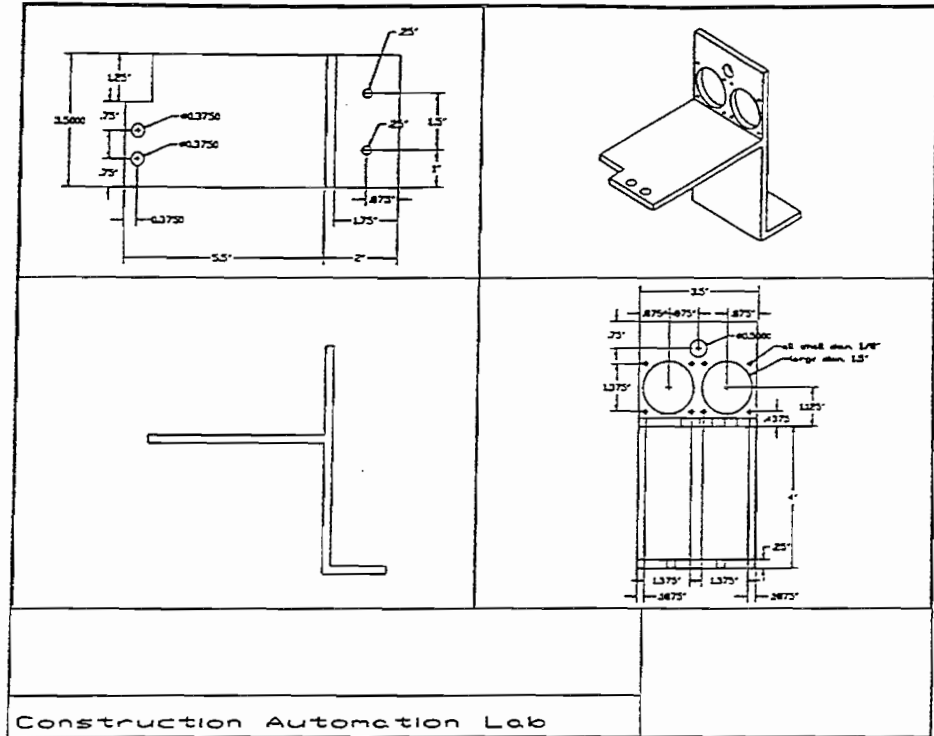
Cable Hard Connect Drawing - Manufactured by the Automated Construction Laboratory
